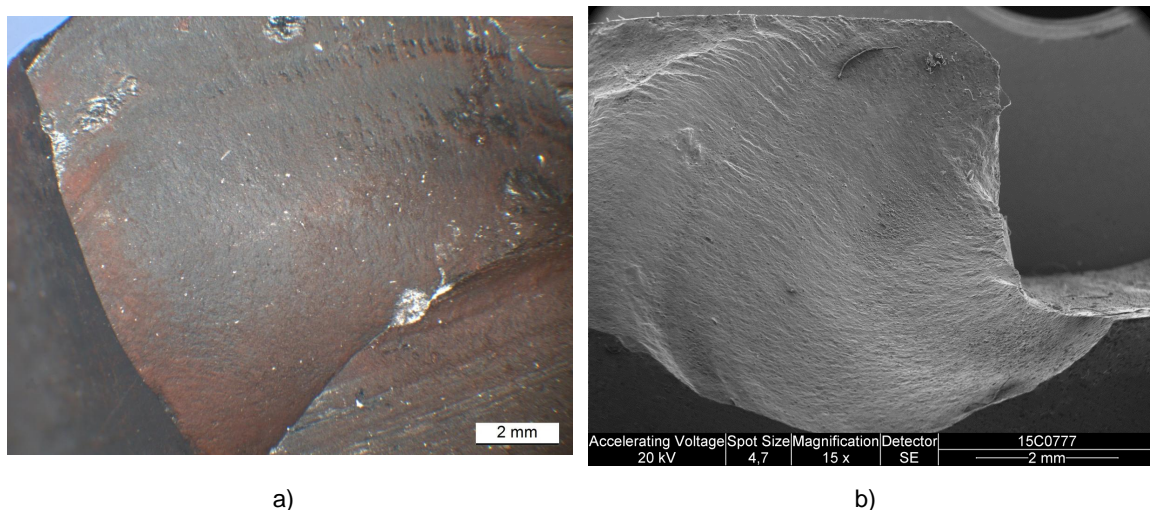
Fracture surface at the blade root of the blade with the detached piece (blade 45).
